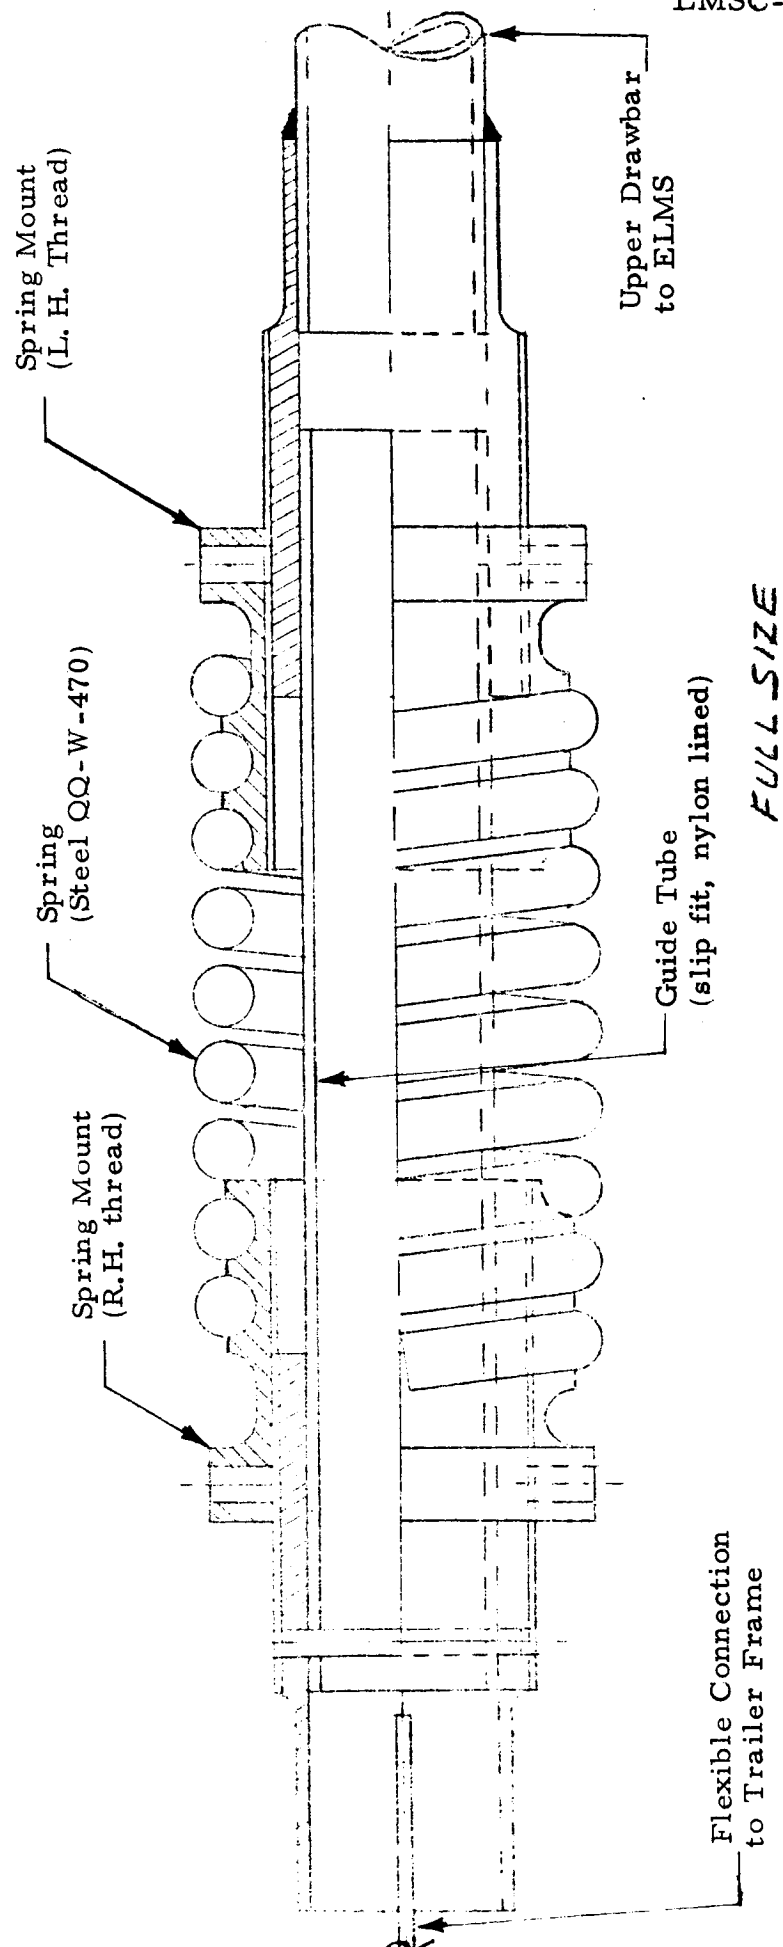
Spring Connection to be Mounted to Upper Trailer Drawbars in Flexible Pitch Joint
